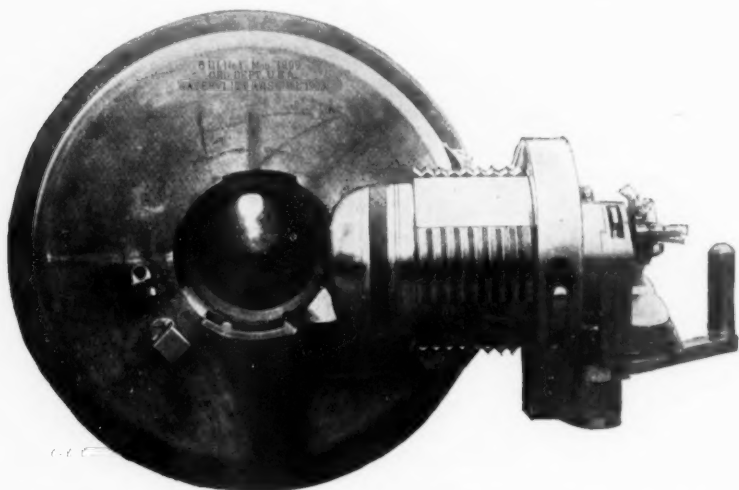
BREECH MECHANISM, 6-INCH R. F. GUN. MODEL OF 1900.
